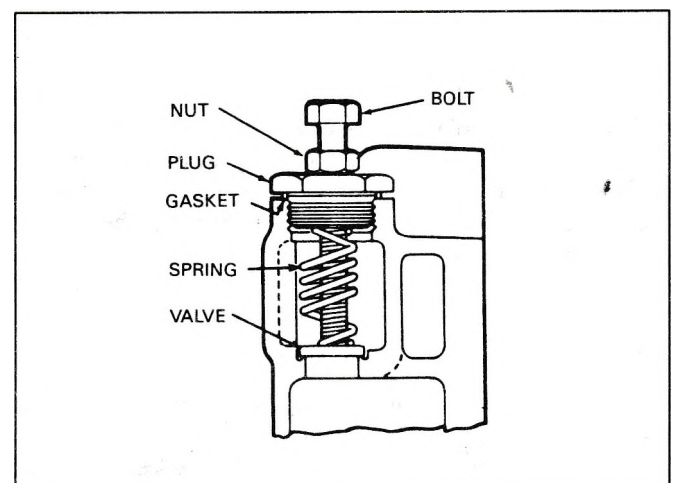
Bypass Valve with Modified Valve Plug Installed
